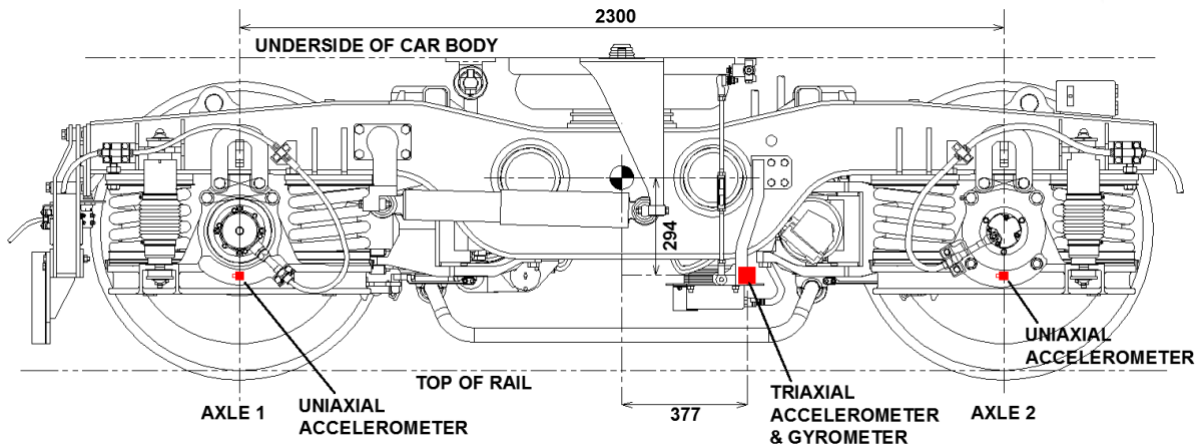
Sensor installation locations on trailer bogie (dimensions in mm). (CAD drawing sourced from Tokyu Car Corporation).
